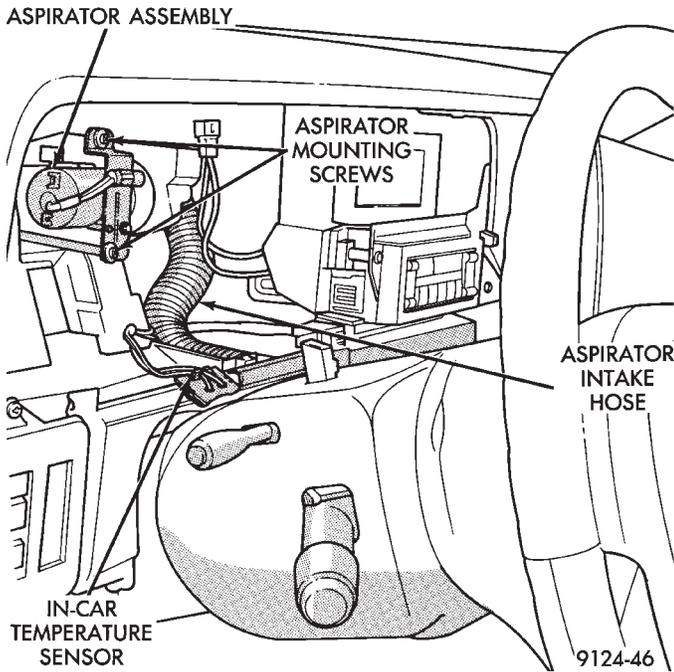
In-car Temperature Sensor/Aspirator Assembly
